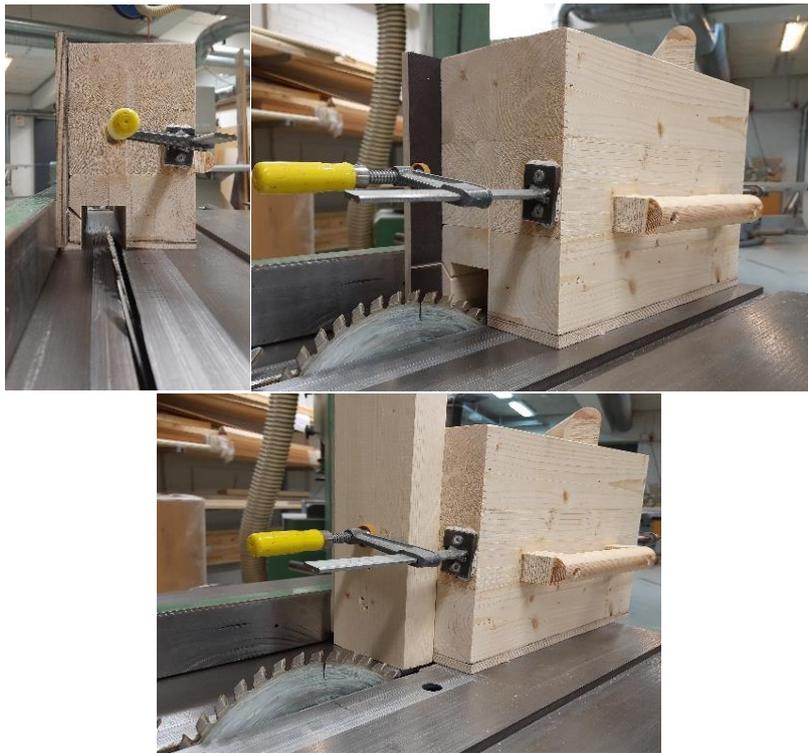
Jig used to cut the full board triangular shape interlocking pattern.
